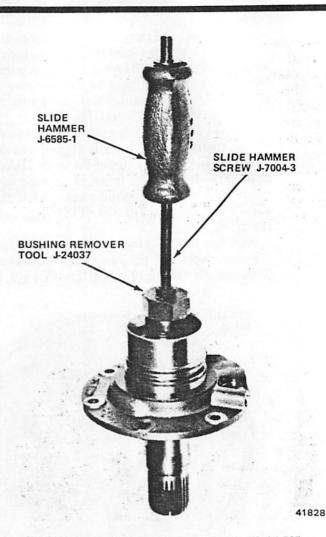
C-65 Reaction Shaft Bushing Removal—Model 727
